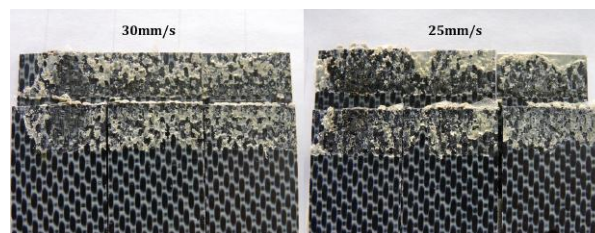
The fracture surface at a speed of 30mm/s(left) and the fracture speed of 25mm/s(right)
